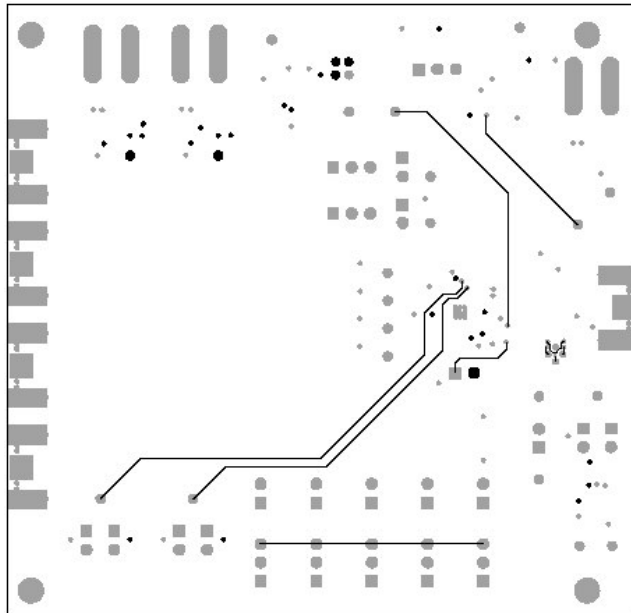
MAX3701 EV Kit PC Board Layout - Solder Side
